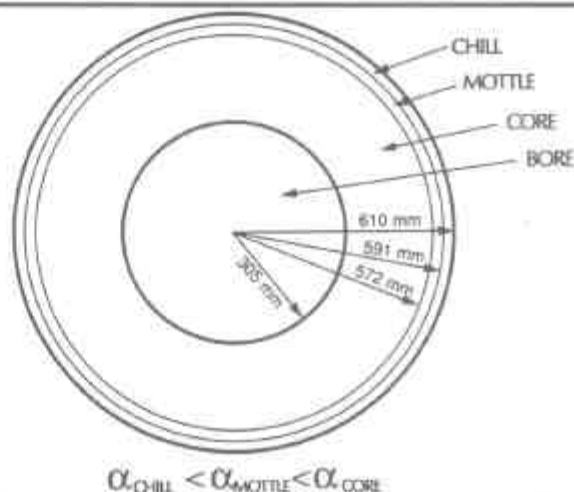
CROSS-SECTION OF CALENDAR ROLL SHOWING THE LAYERS OF CHILL AND MOTTLE ON THE CORE IRON.
